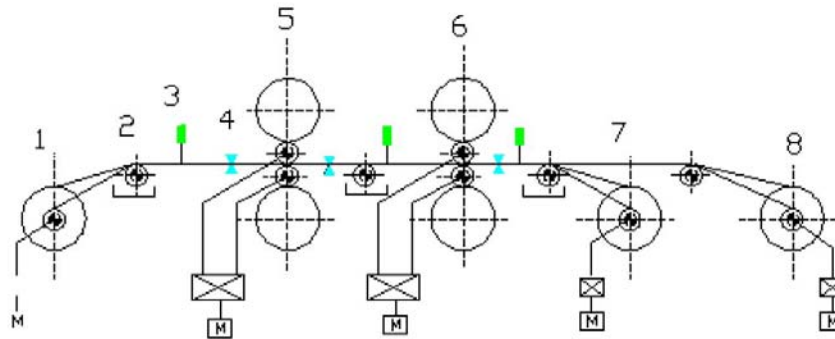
2-stand tandem cold strip mill: (1) Coiling #2, (2) tension meter, (3) laser velocimeter, (4) thickness gauge, (5) stand #2, (6) stand #1, (7) coiling machine #1 and (8) uncoiling machine.
